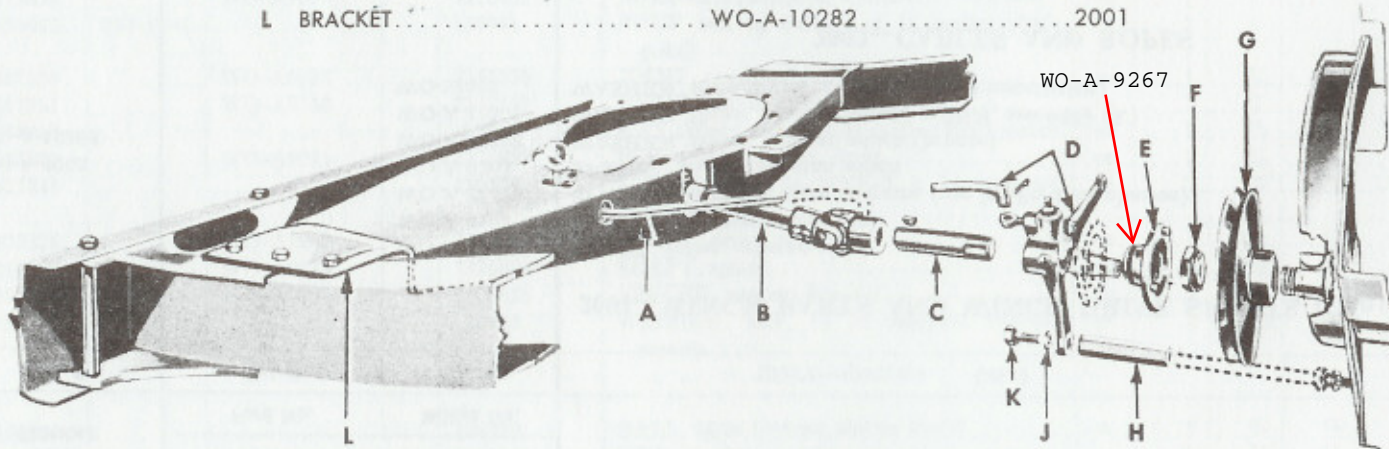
CAPSTAN WINCH MOUNTING BRACKET AND DRIVE SHAFT
